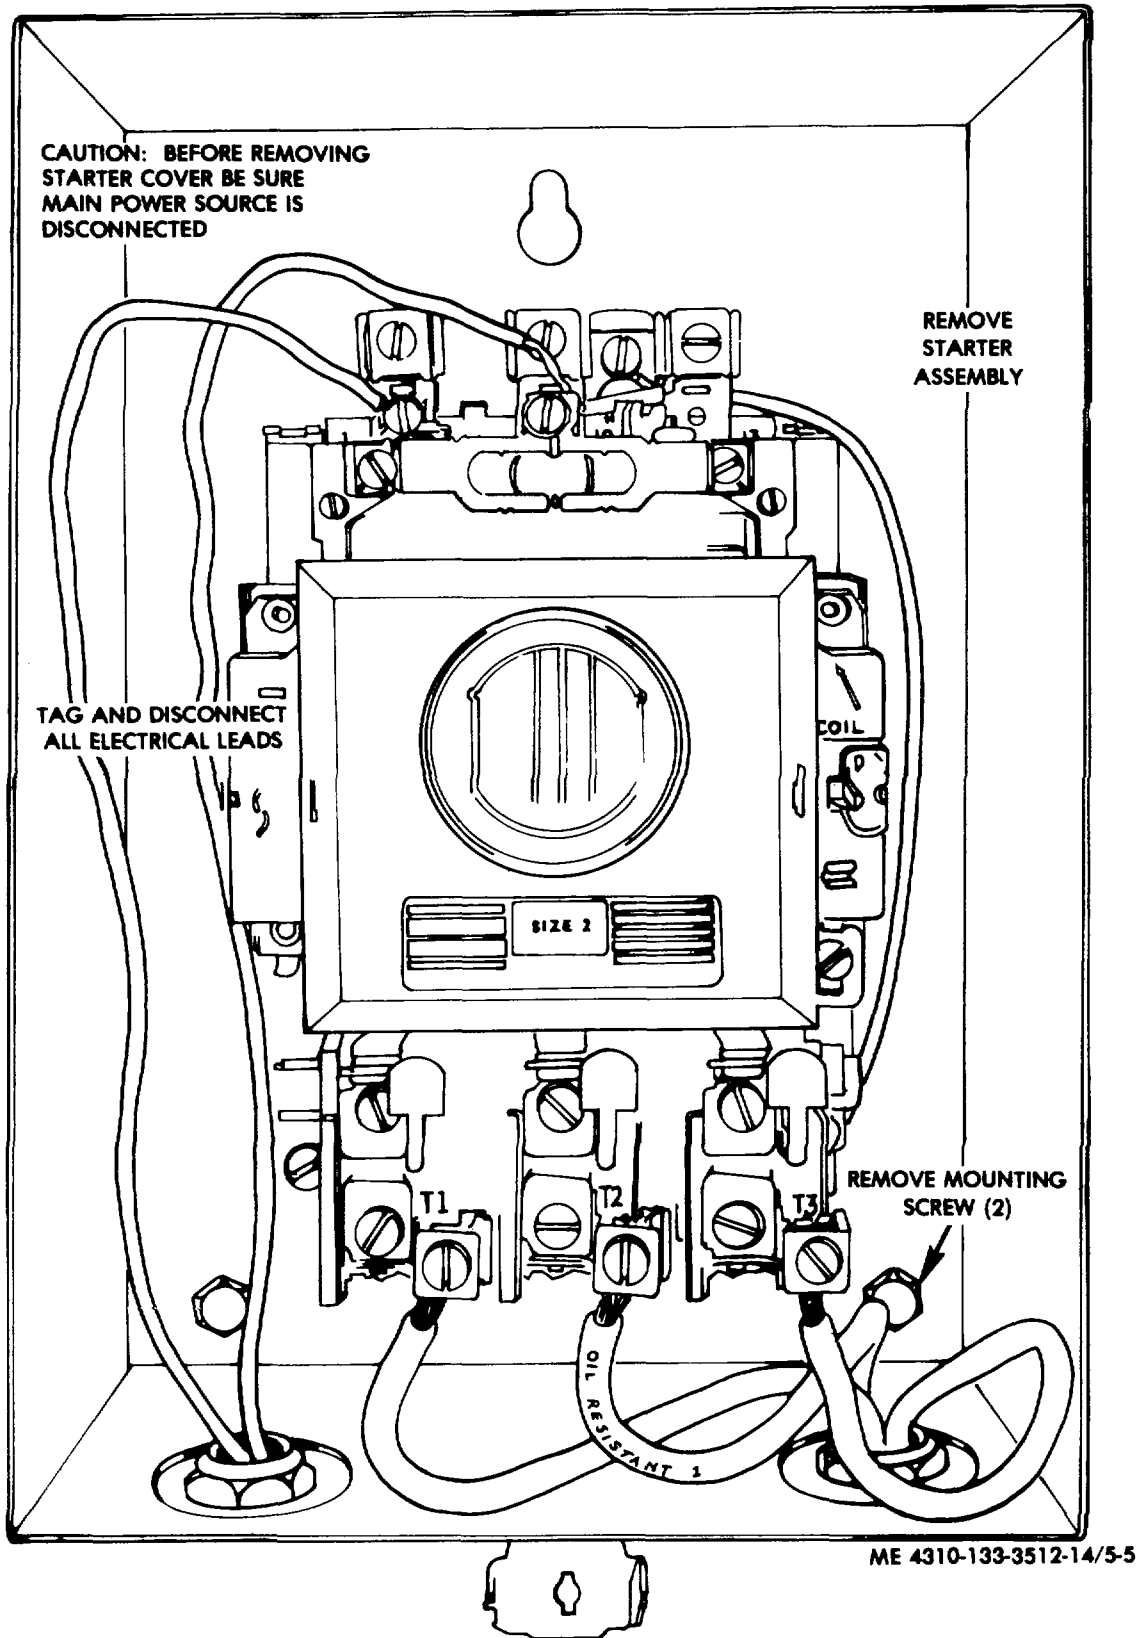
Champion pneumatic magnetic starter removal (shown with cover removed)
